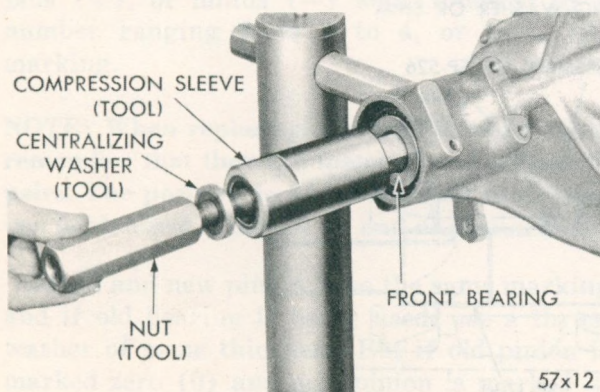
Bearing Installed on Main Body of Tool C-758-D-3
